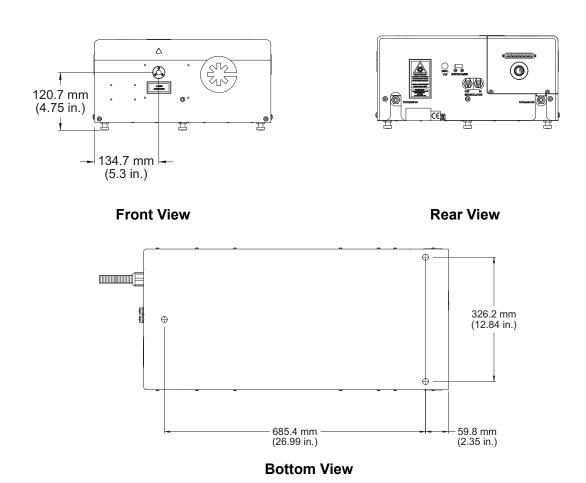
Chameleon Vision-S Laser Component Dimensions (Continued)
